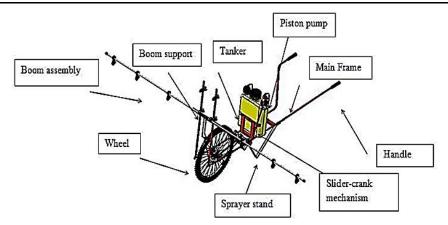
Complete sprayer assembly parts (Nangare et al., 2018).
